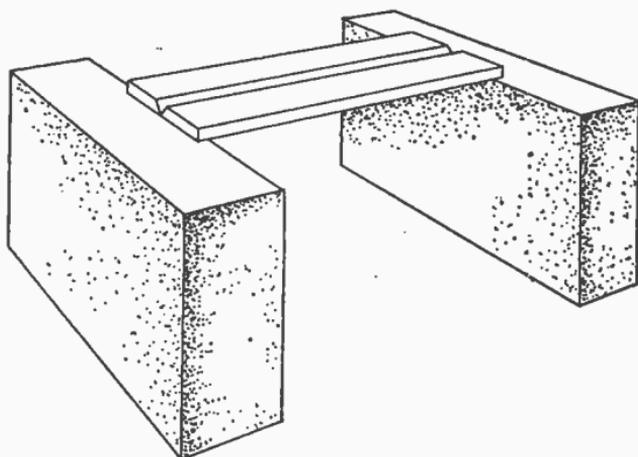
,158.—Plates beveled for welding. *Instructions:* Lay the 6 in. by  $1\frac{1}{4}$  in. by  $\frac{3}{16}$  in. beveled plates on the fire-bricks with the edges parallel and  $\frac{1}{16}$  in. apart. Tack at the right end firmly, fusing in a few drops of welding rod. If the edges be thrown out of parallel by tacking pry them open to approximately parallel position. Start welding at the left, using  $\frac{1}{2}$  in. welding rod. Be careful to get thorough penetration and to manipulate the torch so as to cover the larger puddle than the beginner has heretofore produced. Build the weld up square at the beginning. Fill the bevel groove with weld metal, making sure that the base metal on both sides is well fused before covering with weld metal. Build up the weld smoothly about  $\frac{1}{4}$  in. above the surface of the plates. Finish the weld and build up the end square. Cool the weld piece in water, and break in the vise. A heavy hammer and repeated blows should be necessary to break the weld if properly made.
